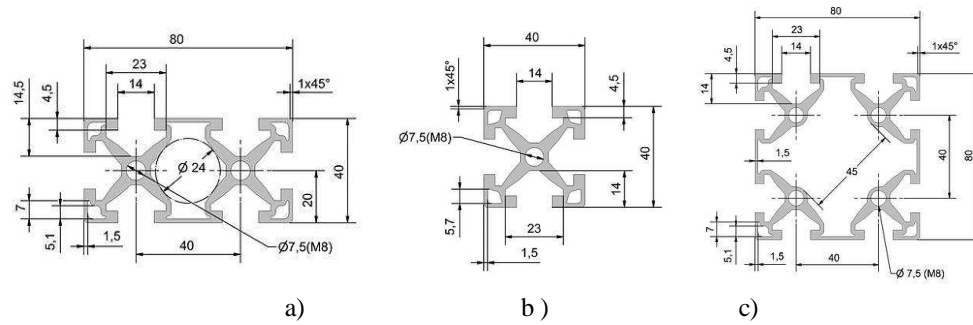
Aluminium profiles used in the construction of CNC milling device
